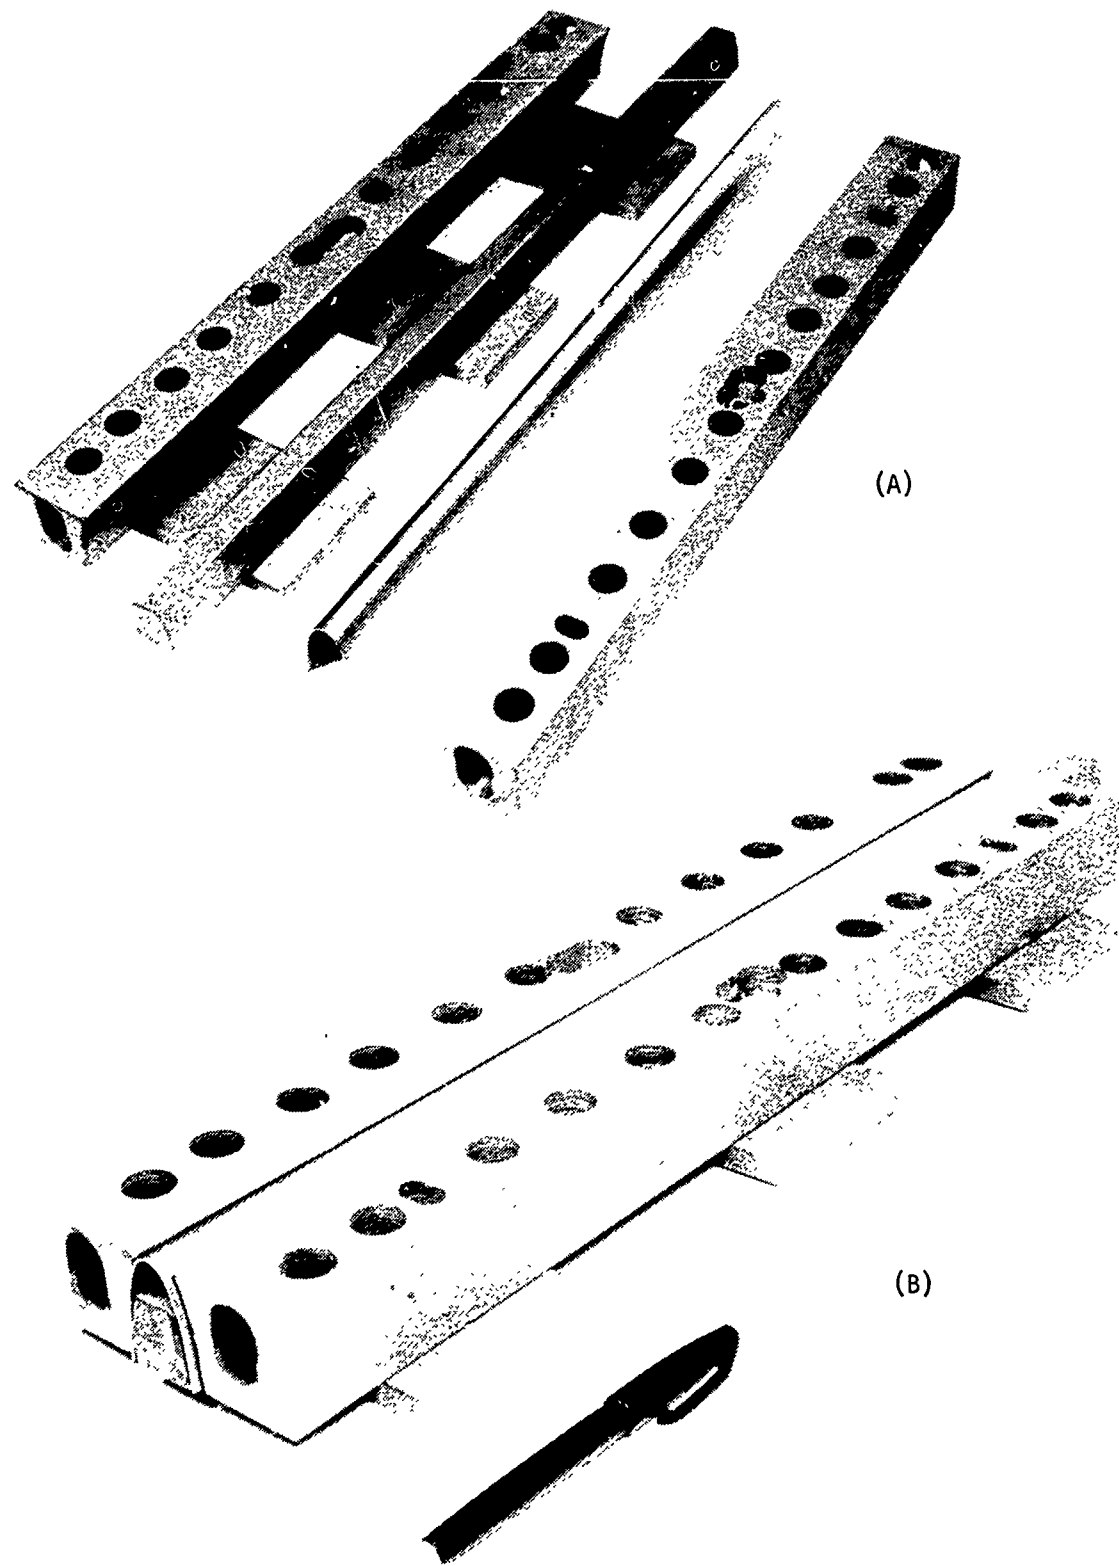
Mild Steel Fixture for Coating Hughes SAE 430 Specimens
